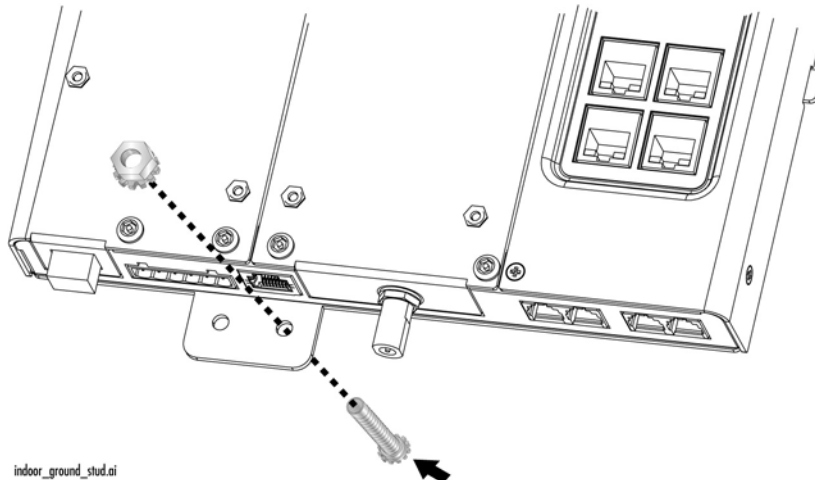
Mounting the Grounding Assembly on the Right Mounting Hole
